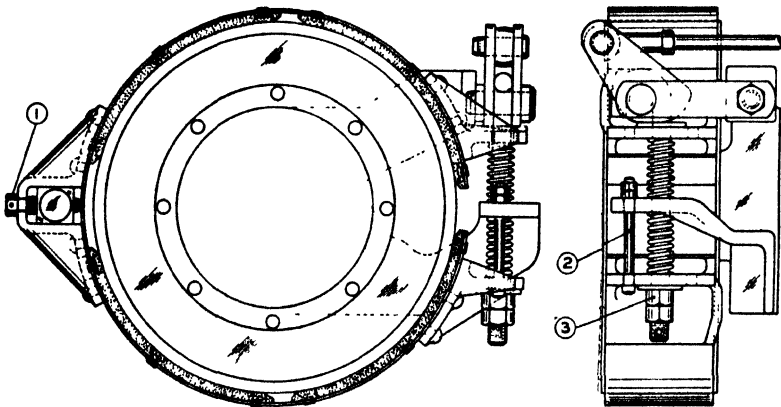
BAND-TYPE PARKING BRAKE (MACK).
